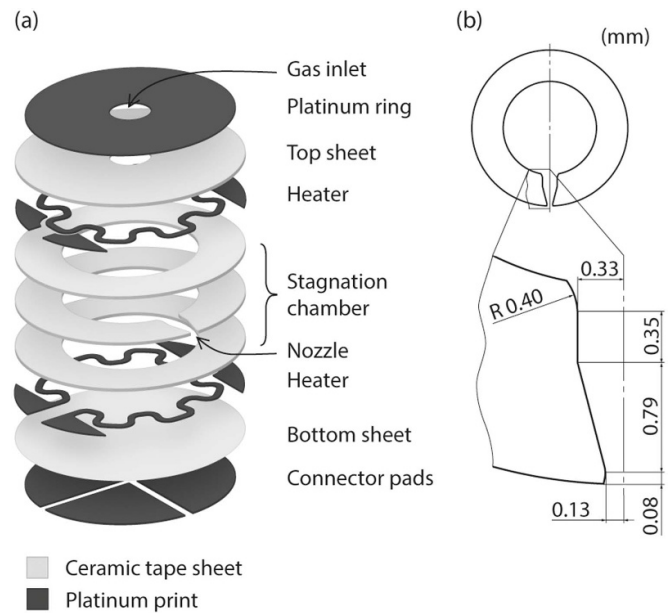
Exploded view of the microthruster (a) along with a selection of the dimensions of the nozzle (b). All dimensions are prior to sintering.
